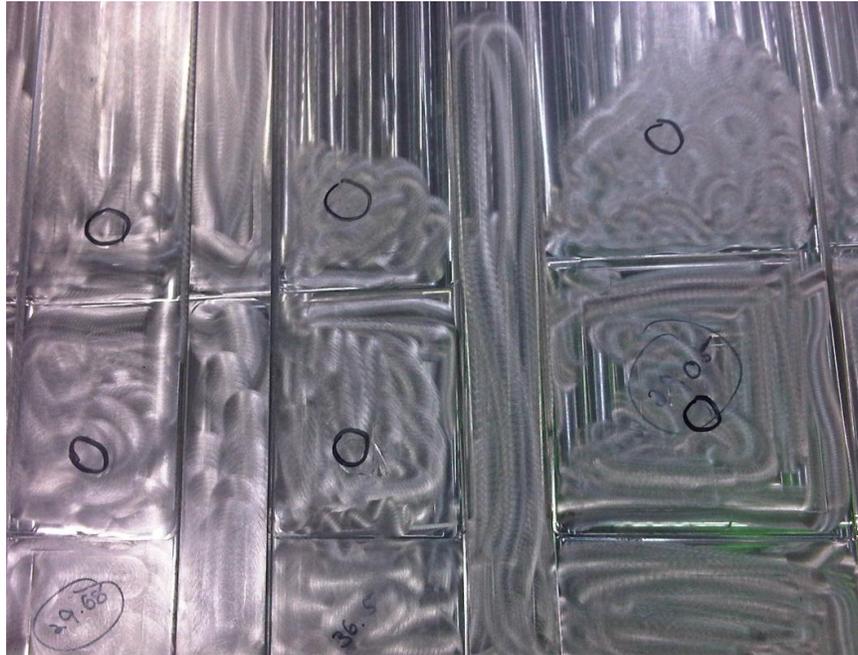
Monolithic 7050-T7452 Forged Block Fatigue Test Specimens
